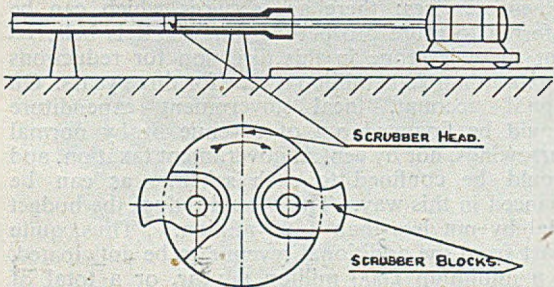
Scrubbing Machine for Cleaning the Interior of Pipes. The Scrubber Blocks are flung out by Centrifugal Force during Rotation and the Pipe is held on the Gantry while the Machine Head is Mechanically Traversed.
